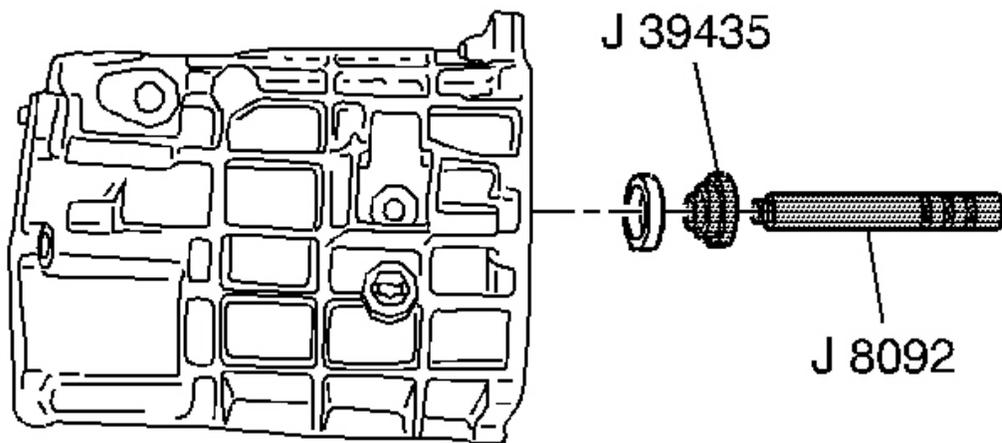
Installing/Removing Countershaft Bearing Race Using J 8092 & J 39435
